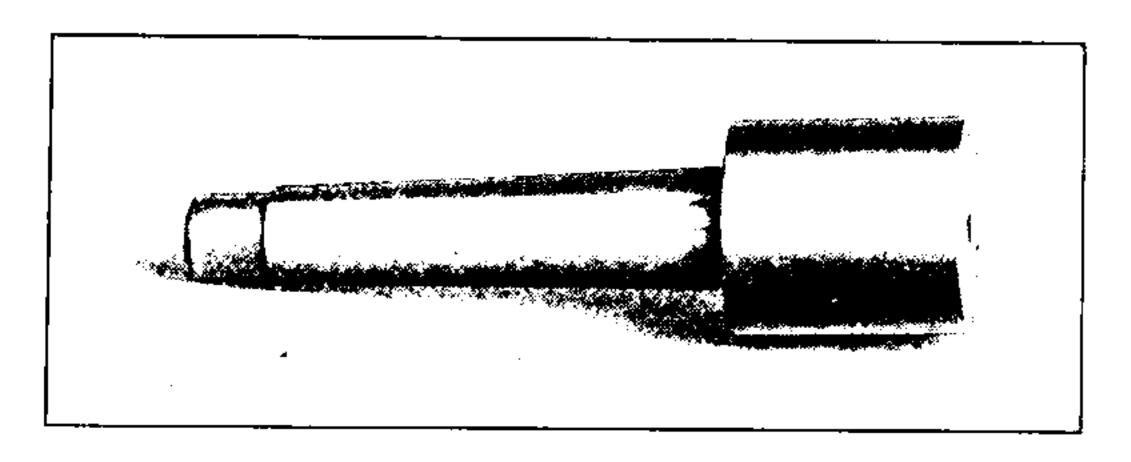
Blank Center — head is soft, 1" diameter, 13/8" long and may be turned to desired form. Taper shank fits center chuck and tailstock spindle
